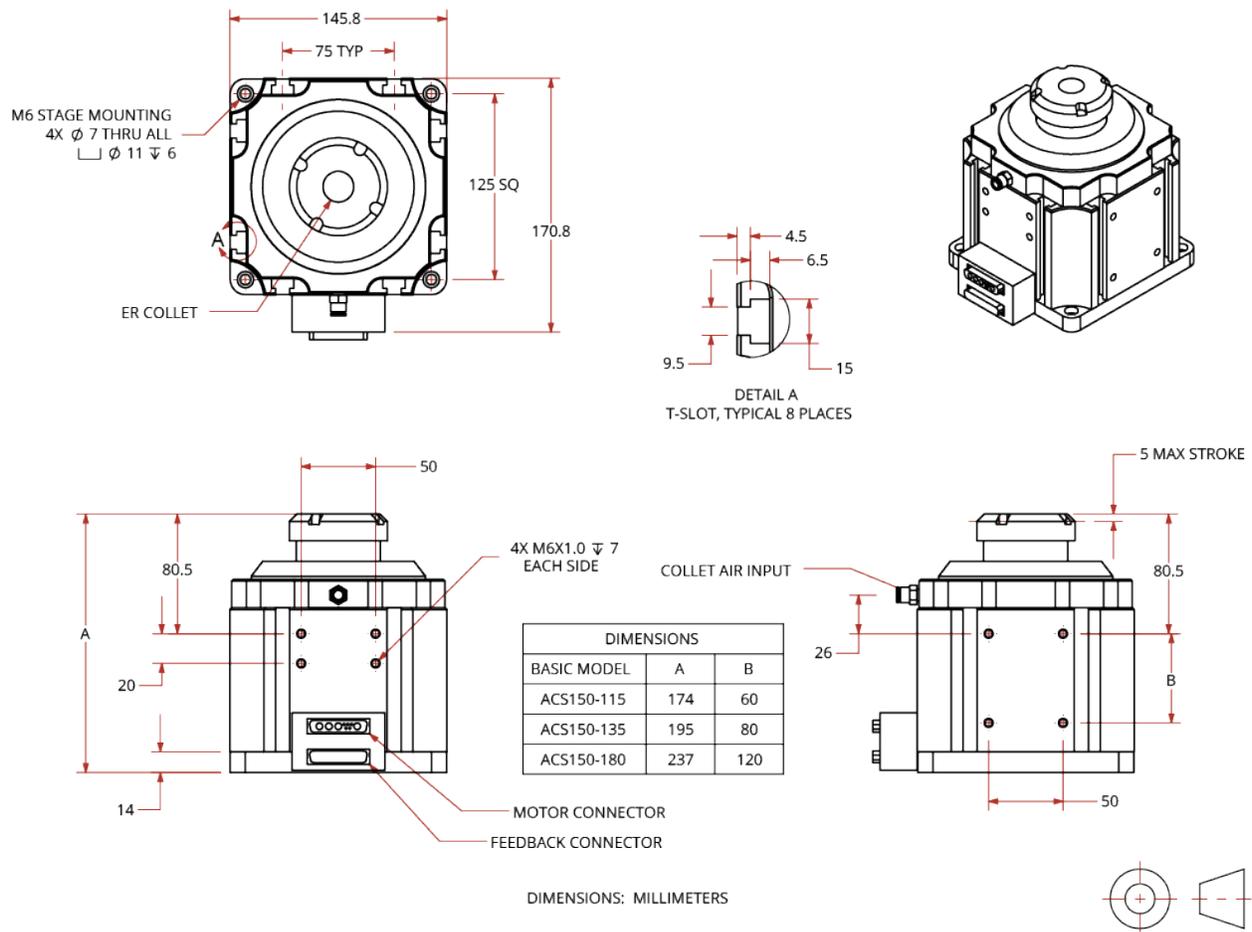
ACS150 (-ER Chuck Style) Dimensions
